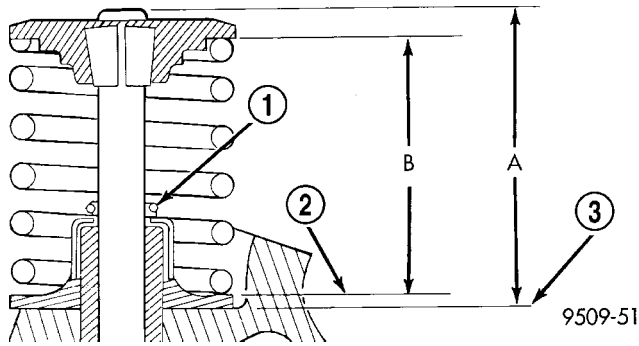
Checking Spring Installed Height and Valve Tip Height Dimensions
